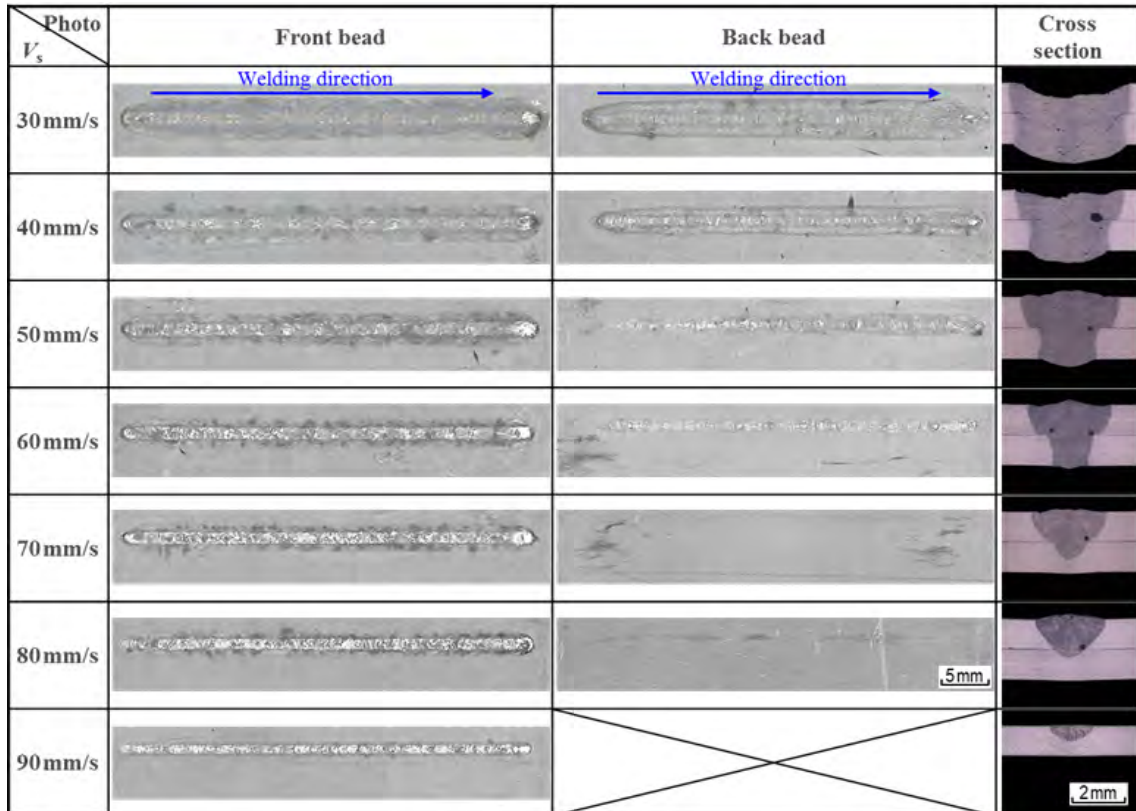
Weld bead appearance and cross-sectional images of AA6014-AA6014 laser lap dissimilar welding by change welding speed at 5 kW laser power
